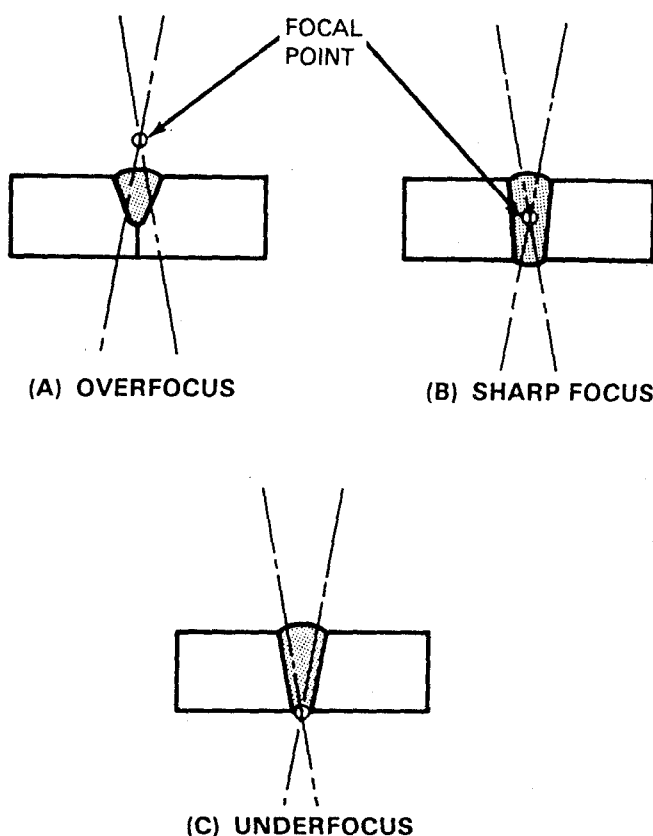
Effect of Electron Beam Focusing on Weld Bead Geometry and Penetration
